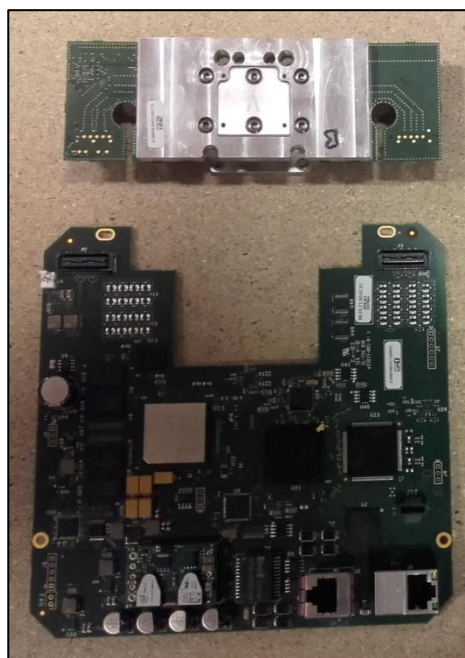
Antenna Frame Assembly, Modem Assembly and Microwave/Control Board/Diplexer Assembly
